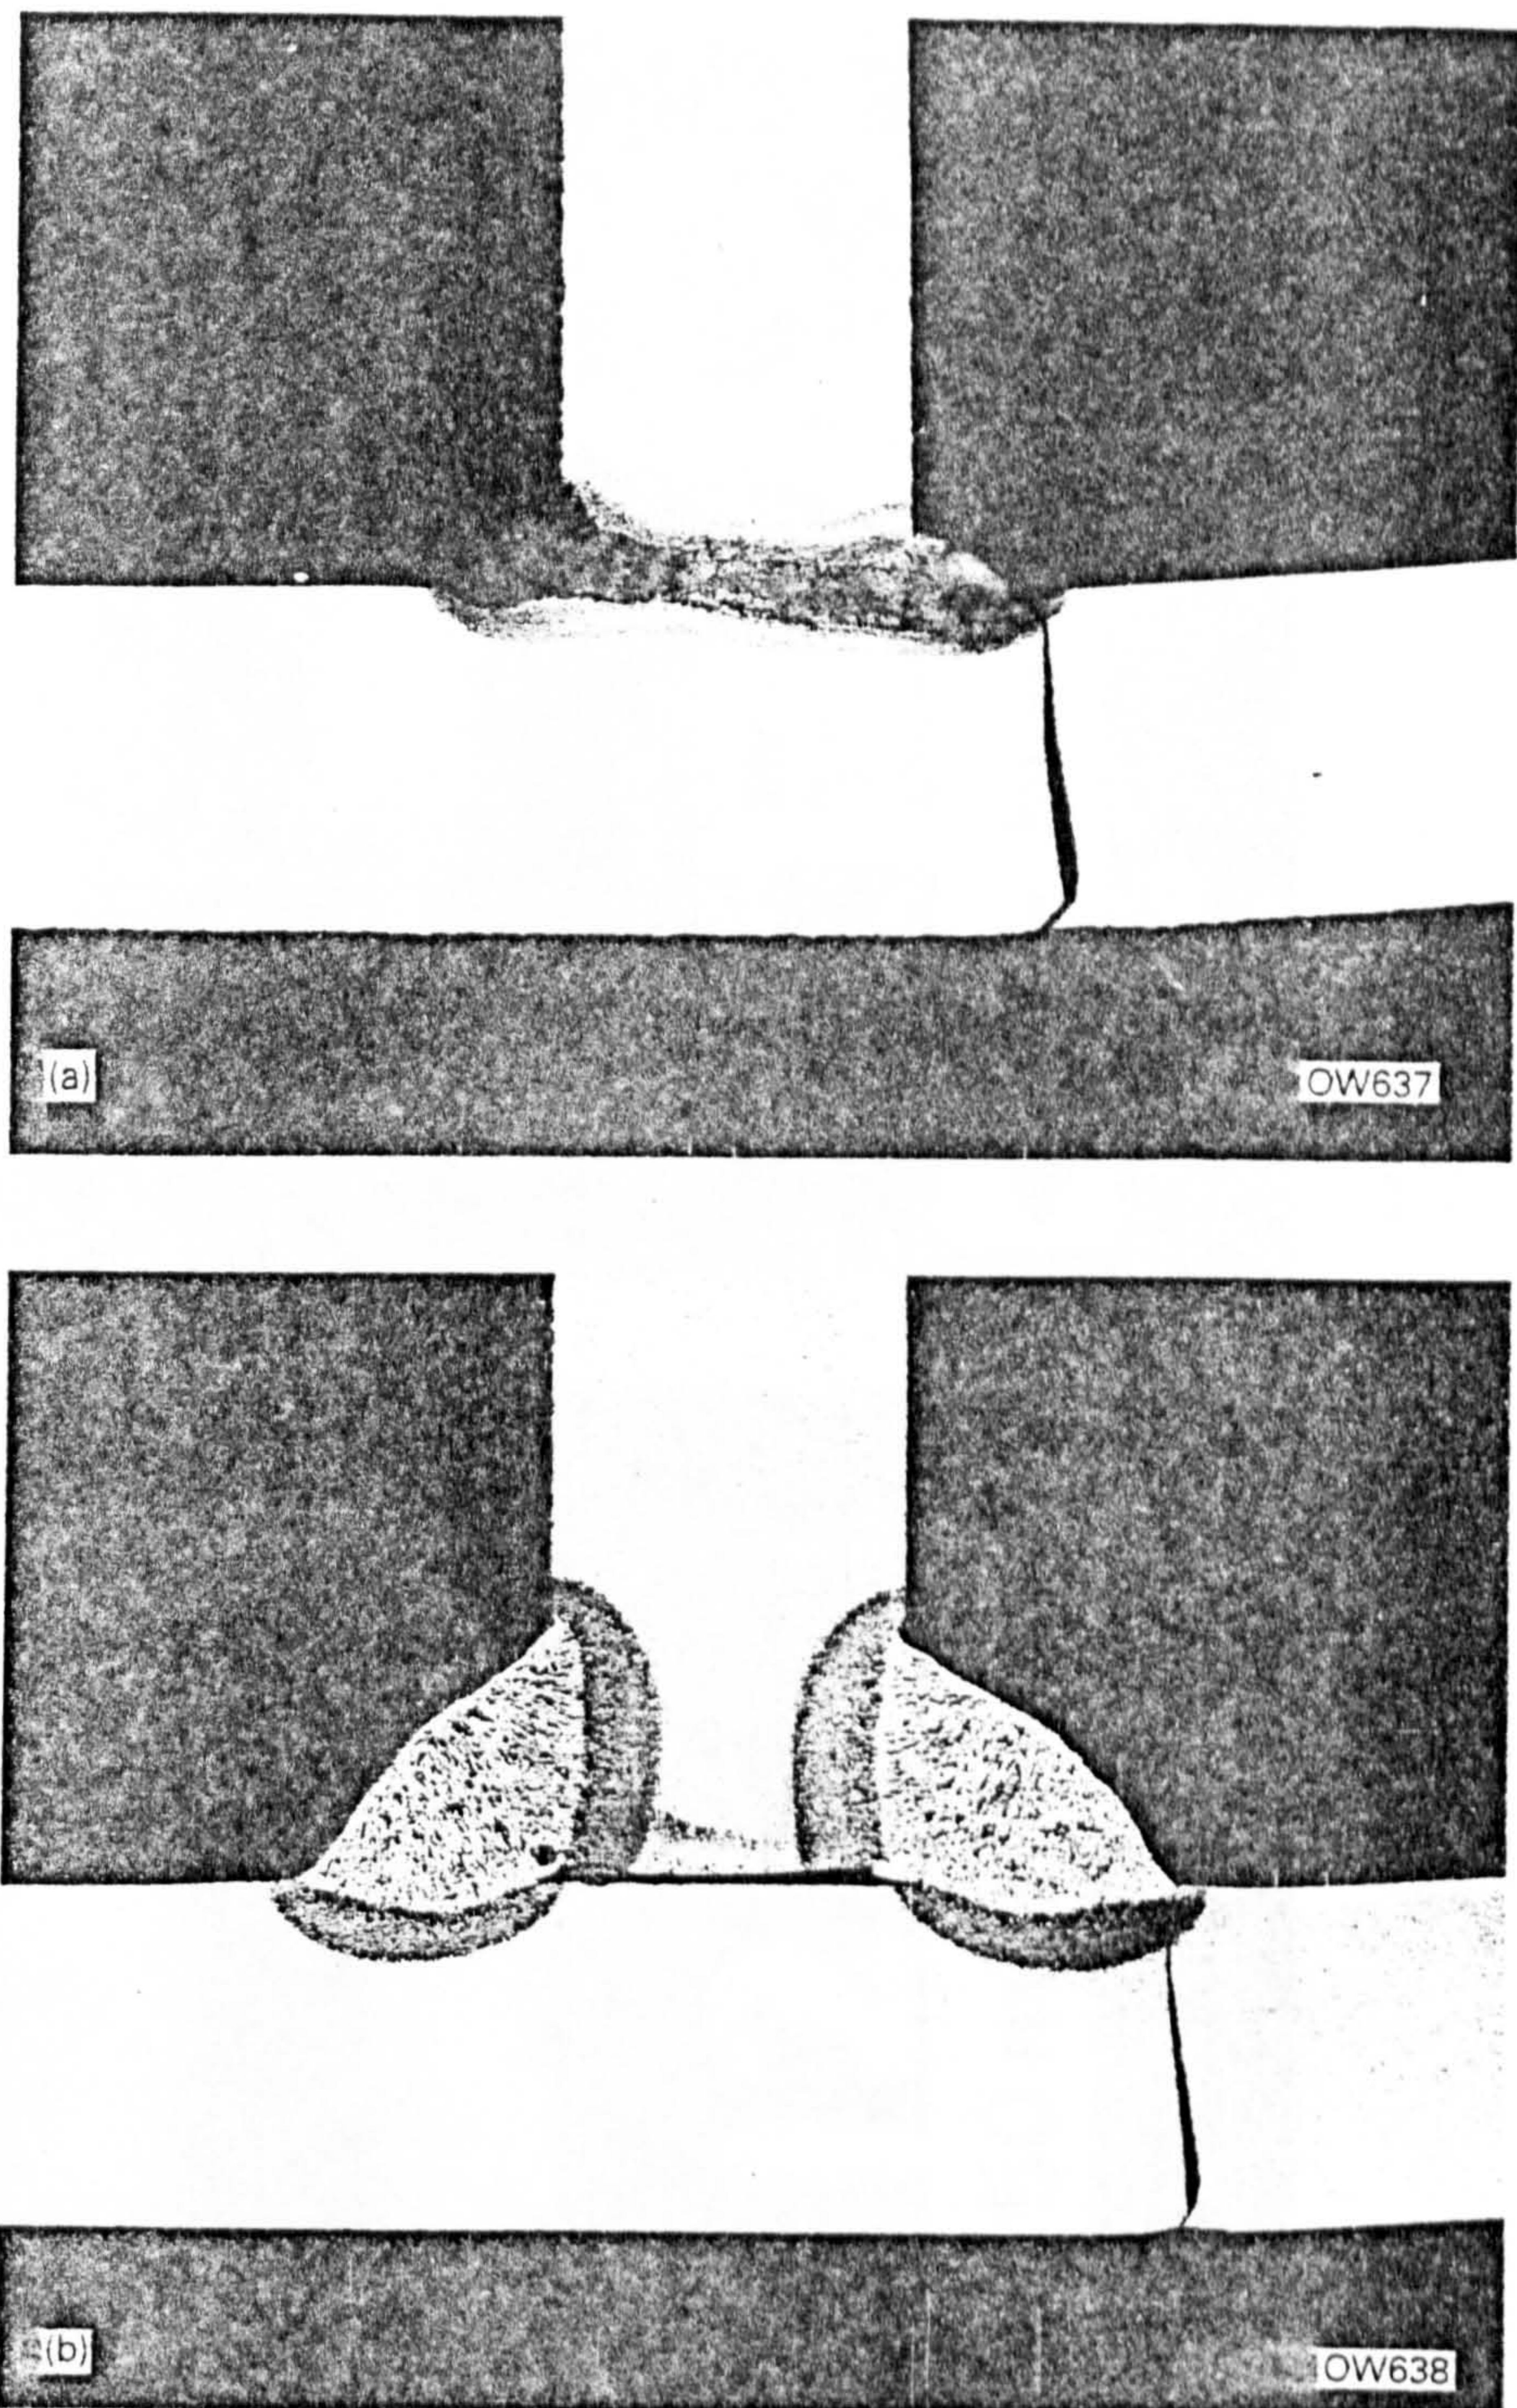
Macrophotographs of sections showing position of fatigue failure, X4:
